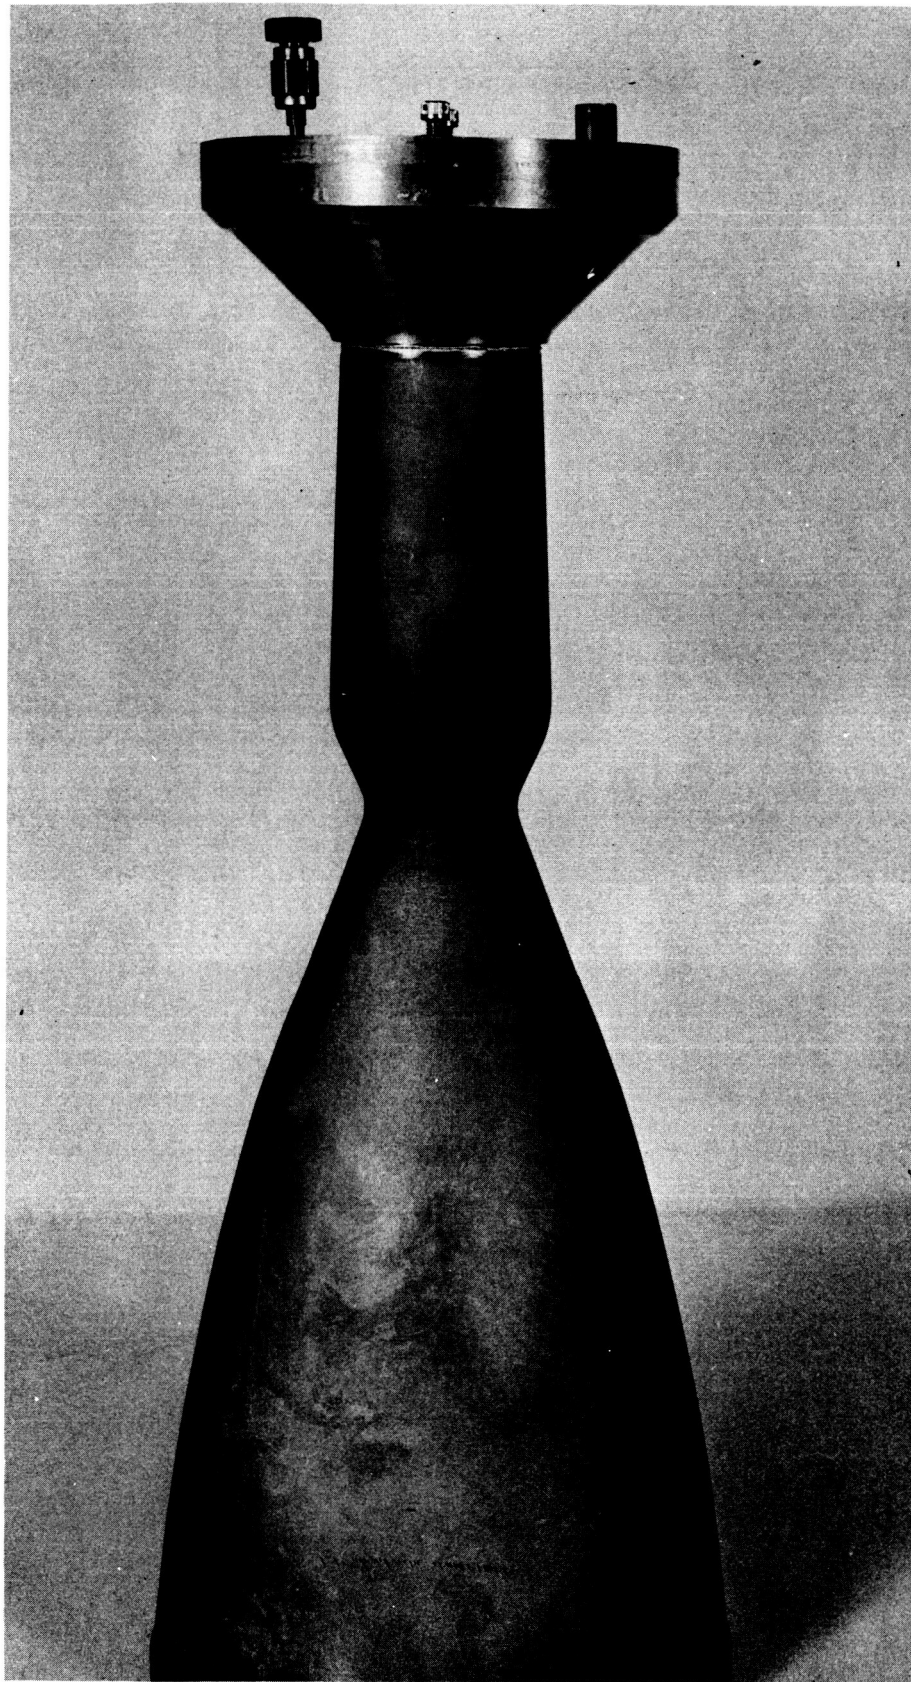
100-lb Thrust Chamber Assembly After Welding Injector and Support to Chamber
